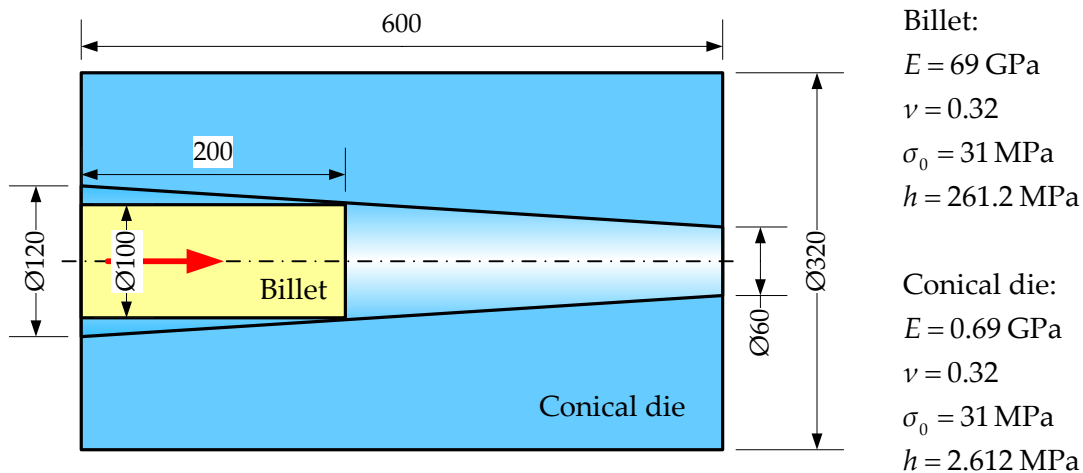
Extrusion of an aluminium billet in a conical die including geometrical and material properties (dimensions in mm).
